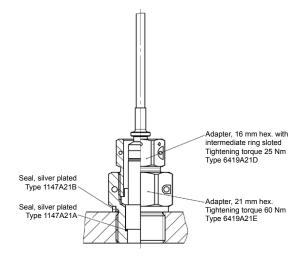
Installation with adapter Type 6419A21E, adapter Type 6419A21D, and seal Type 1147A21A and Type 1147A21B
